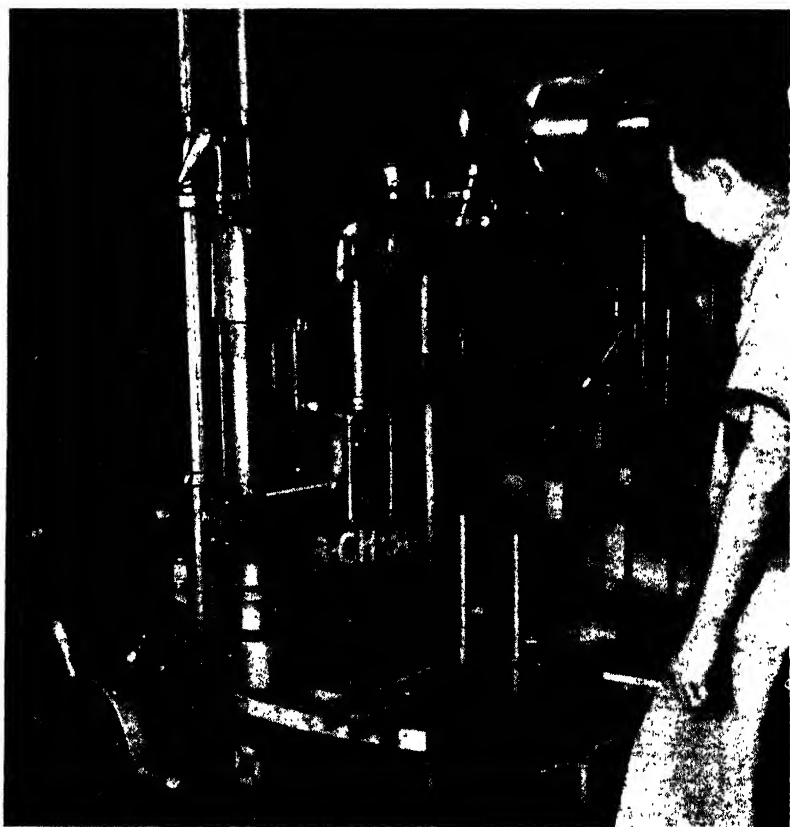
Hydraulic Cutting-off Machine that can be Set for Making the Cuts Straight across or at Any Angle up to 45 Degrees
